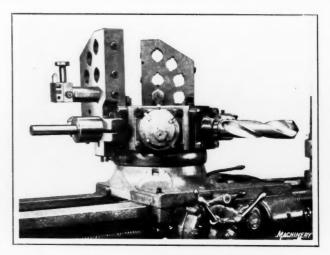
Another View of the Turret Tooling Equipment for the First Operation
